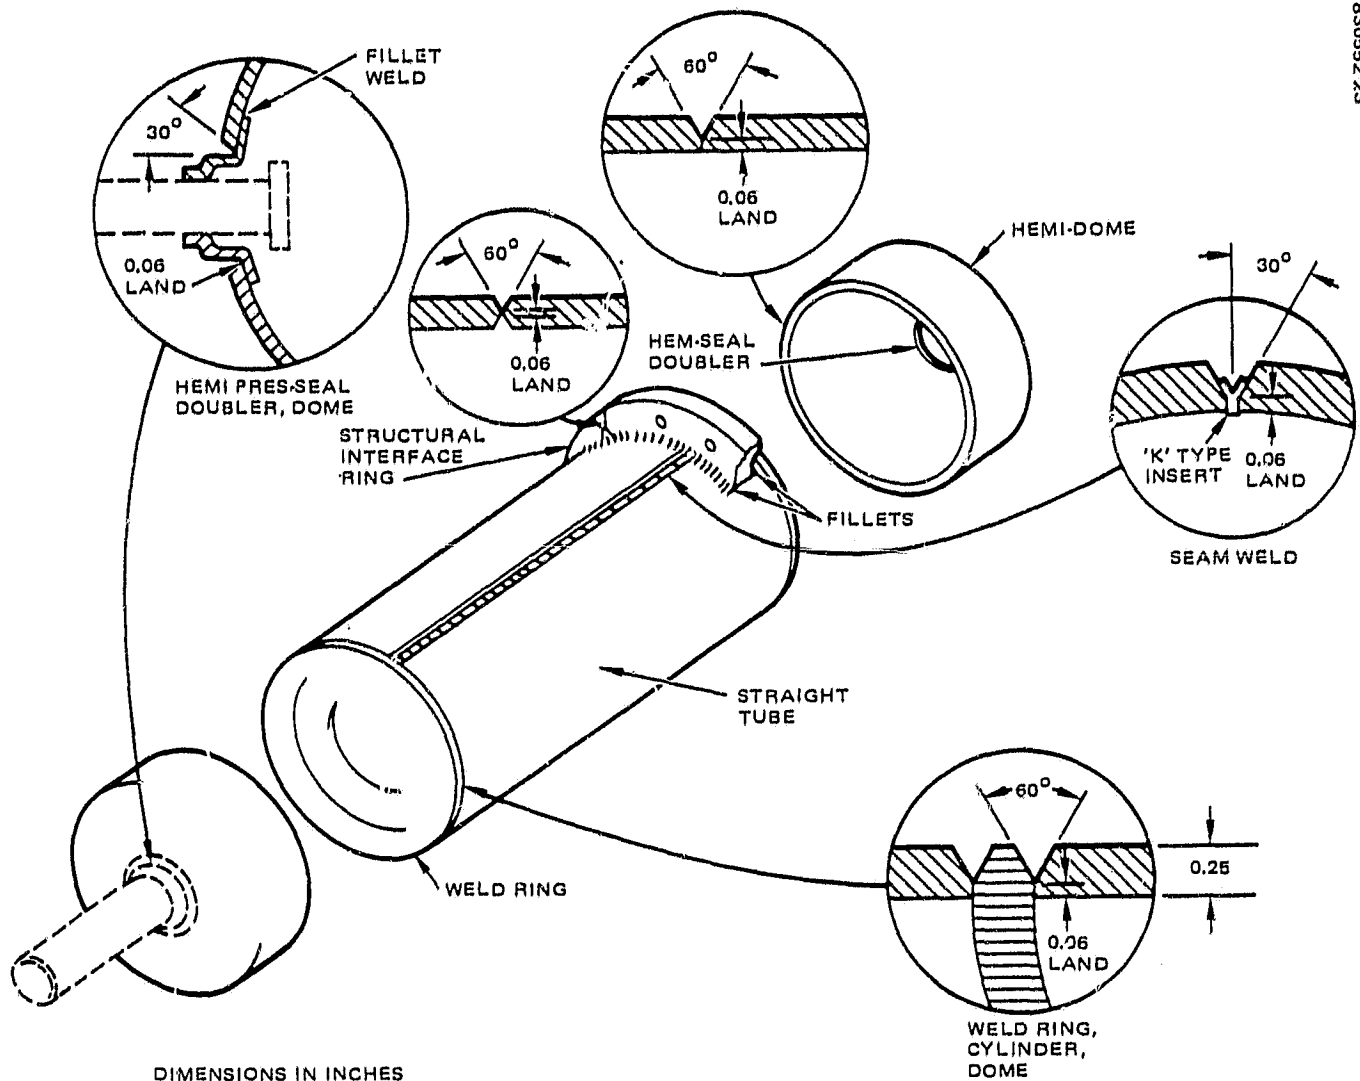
PRESSURE VESSEL WELD DESIGN
